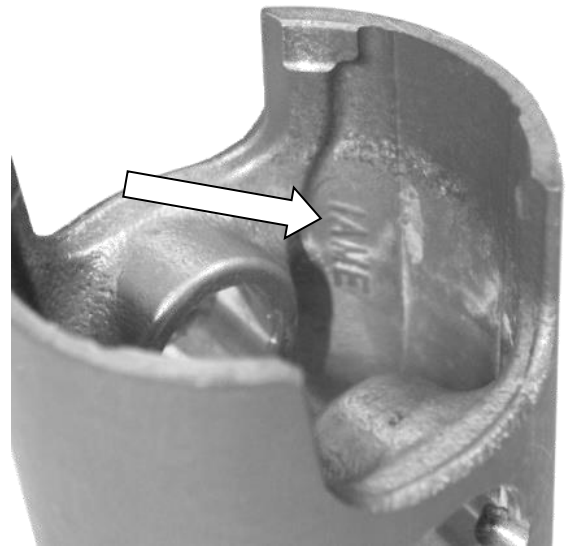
DETAIL OF MACHINING AND SPRING PIN ON CYLINDER
